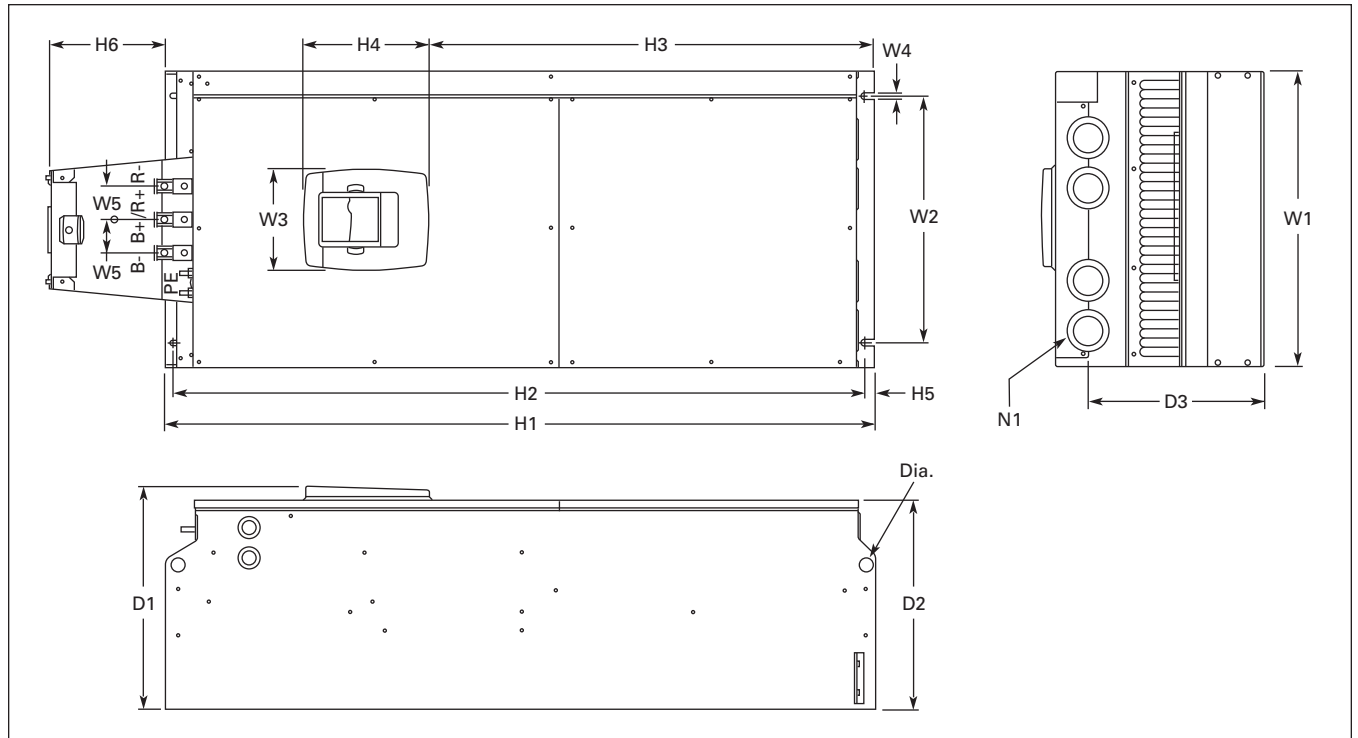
VSD Series Open Drive Dimensions, OPEN 1 and OPEN 12 FR9
